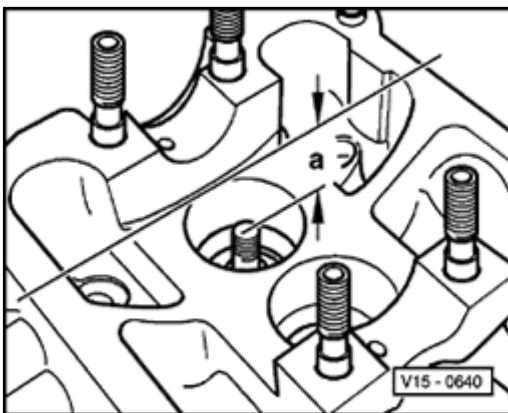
Measuring Distance Between End Of Valve Stem And Upper Edge Of Cylinder Head
